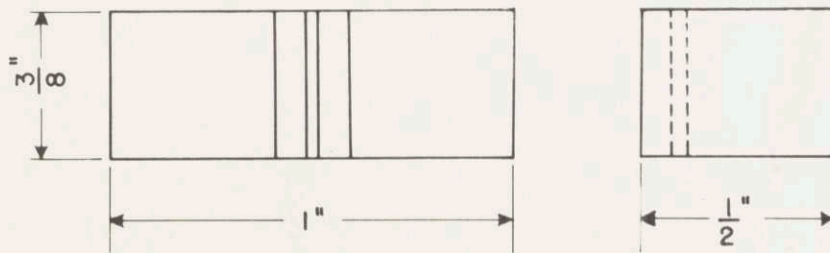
Fixture used to make ends of compression samples parallel to one another, and also perpendicular to one edge of the sample.
